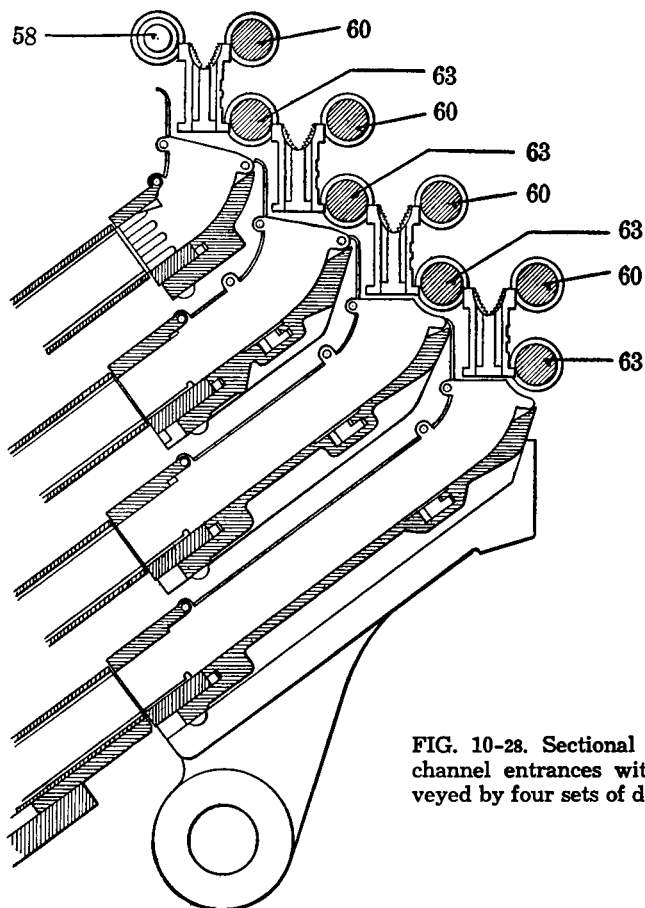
Sectional side view of Model 9 channel entrances with matrices being conveyed by four sets of distributor screws.
